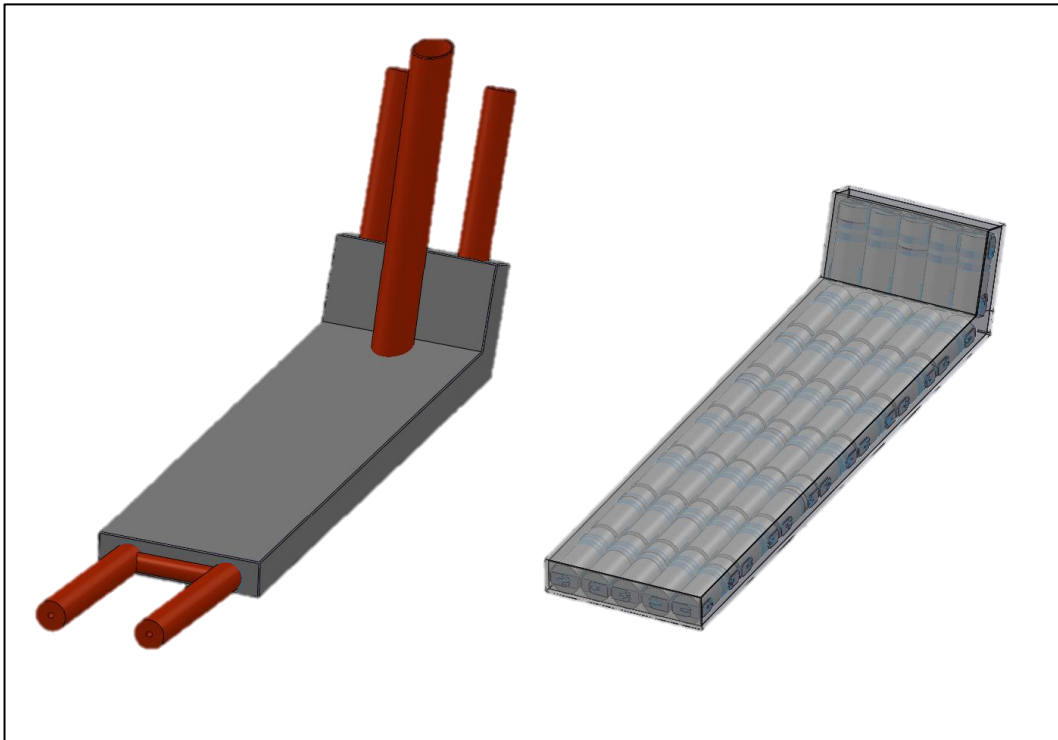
Proposed Cell Enclosure Solution by Integrating with Frame. Dimension Drawing in Appendix 4.
